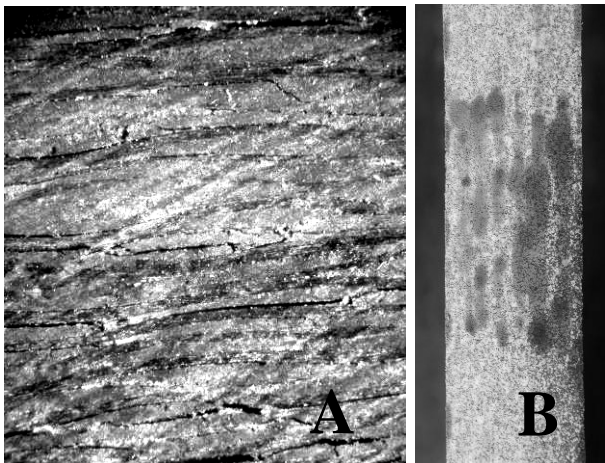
Detail of the failed zone at the end of the test (A) and dye penetrant inspection of a specimen immediately after the failure (B)
